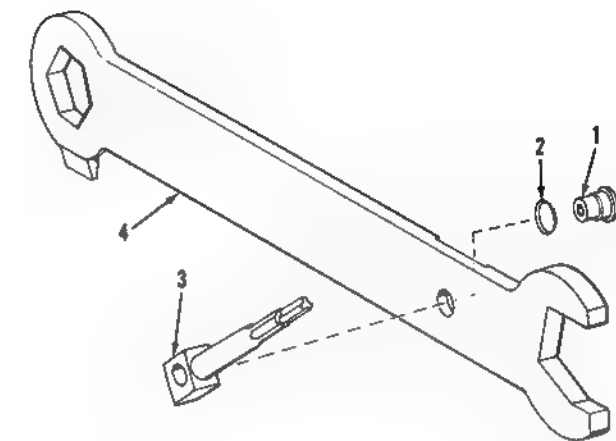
Combination screwdriver and reamer wrench—exploded view.
